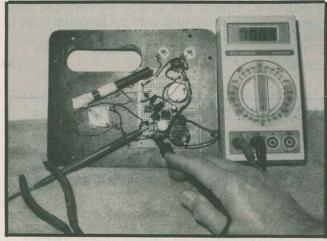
Low resistance measurements between wiring and parts may locate a poorly soldered connection. Check each resistor for correct resistance. Remove one end of the resistor.
